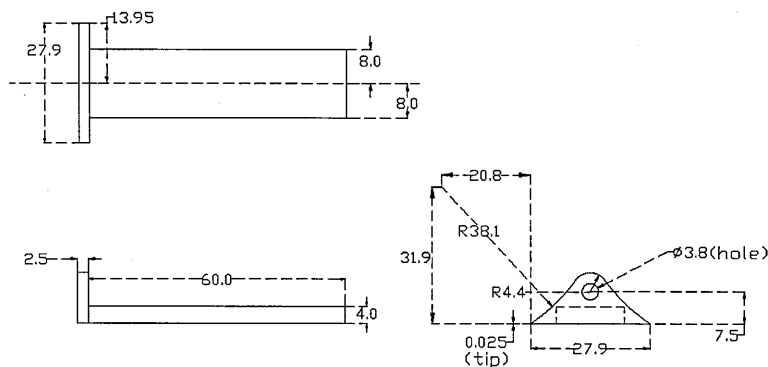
Dimensions of blunt protuberance (all dimensions in millimetres)
